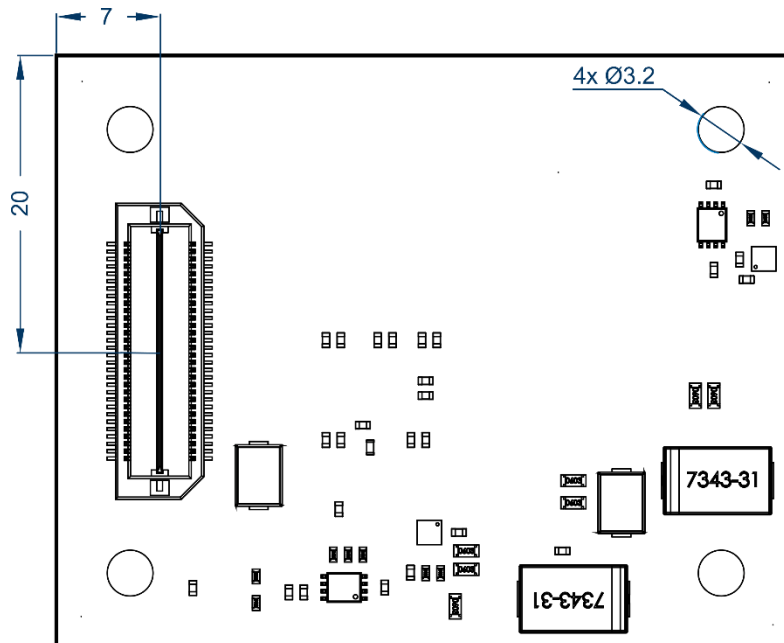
Verdin DSI to LVDS Adapter Dimensions (mm) - Bottom view
